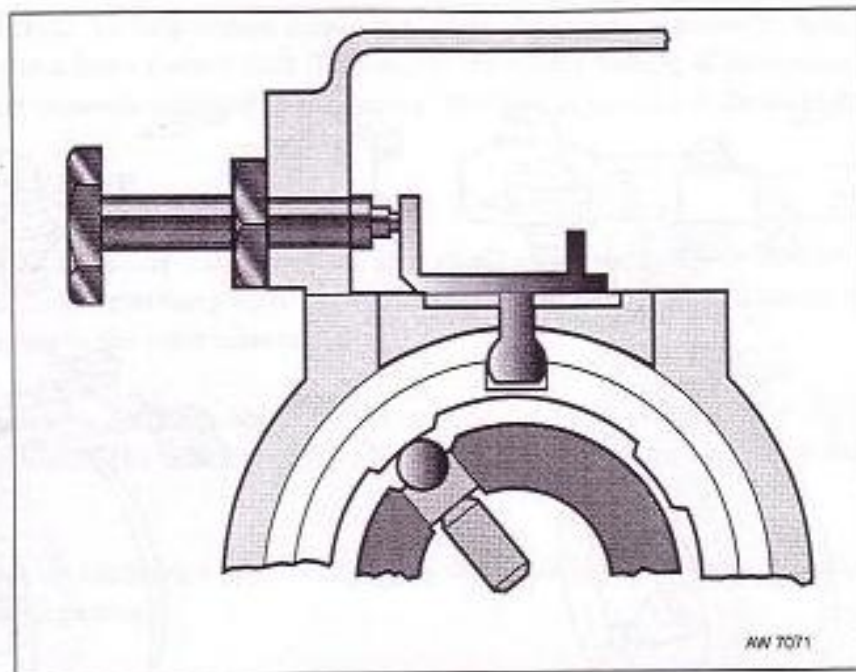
Cam Ring and Scroll Plate Mechanism
